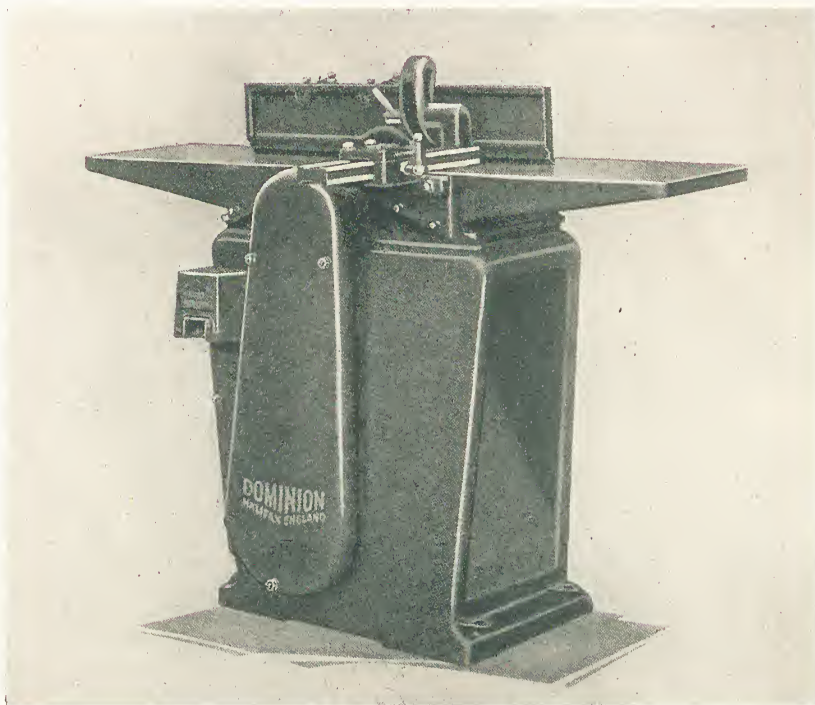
Dominion "BP" type surfacing, jointing, and moulding machine.
